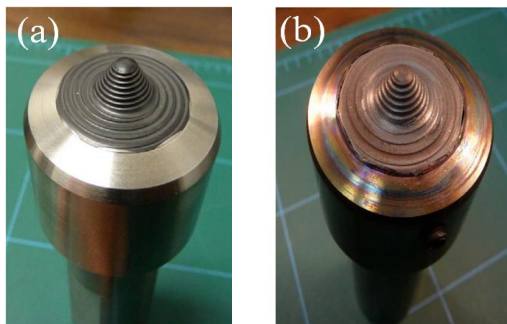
Tungsten and rhenium composite tool developed by Megastir maker; (a) new Q60 tool (b) after 35.6m in mild steel
